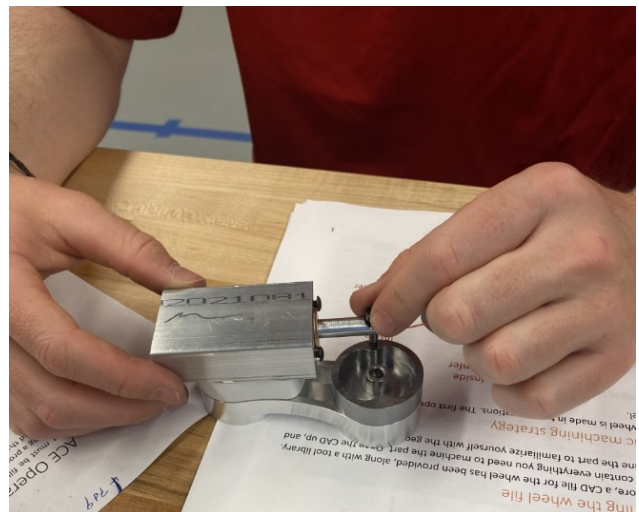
Assembly of oscillating piston air engine by CNC machining training participant.
